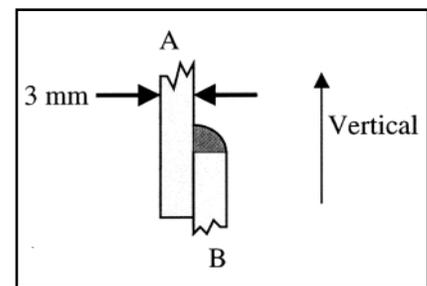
Joint geometry and welding position of parts used in Series I and Series II tests.
